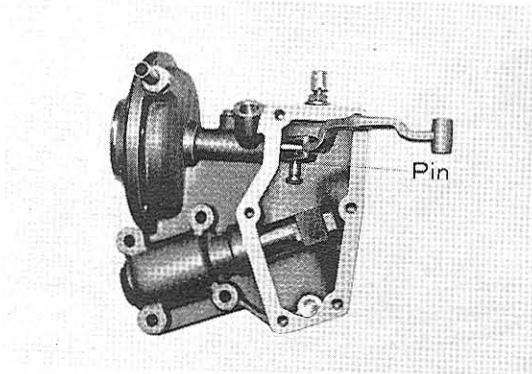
Front Drive Shift V5059 Link Lever Removal
